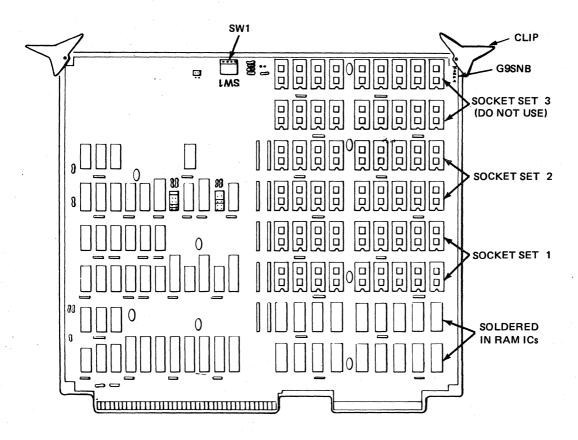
The APC-H31 Memory Expansion Unit PCB (G9SNB)
